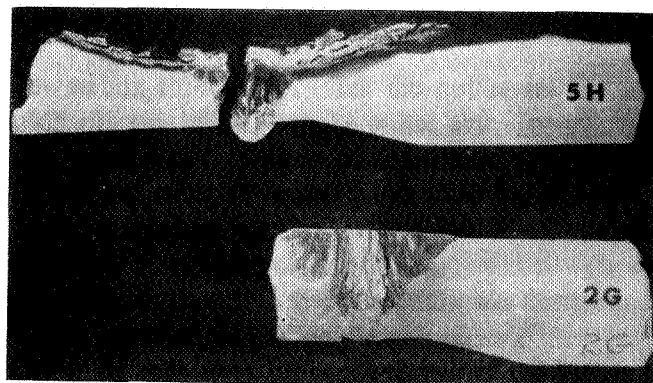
Salt attack at Inconel weld in Incoloy 800. (below: original condition, above: after attack)
